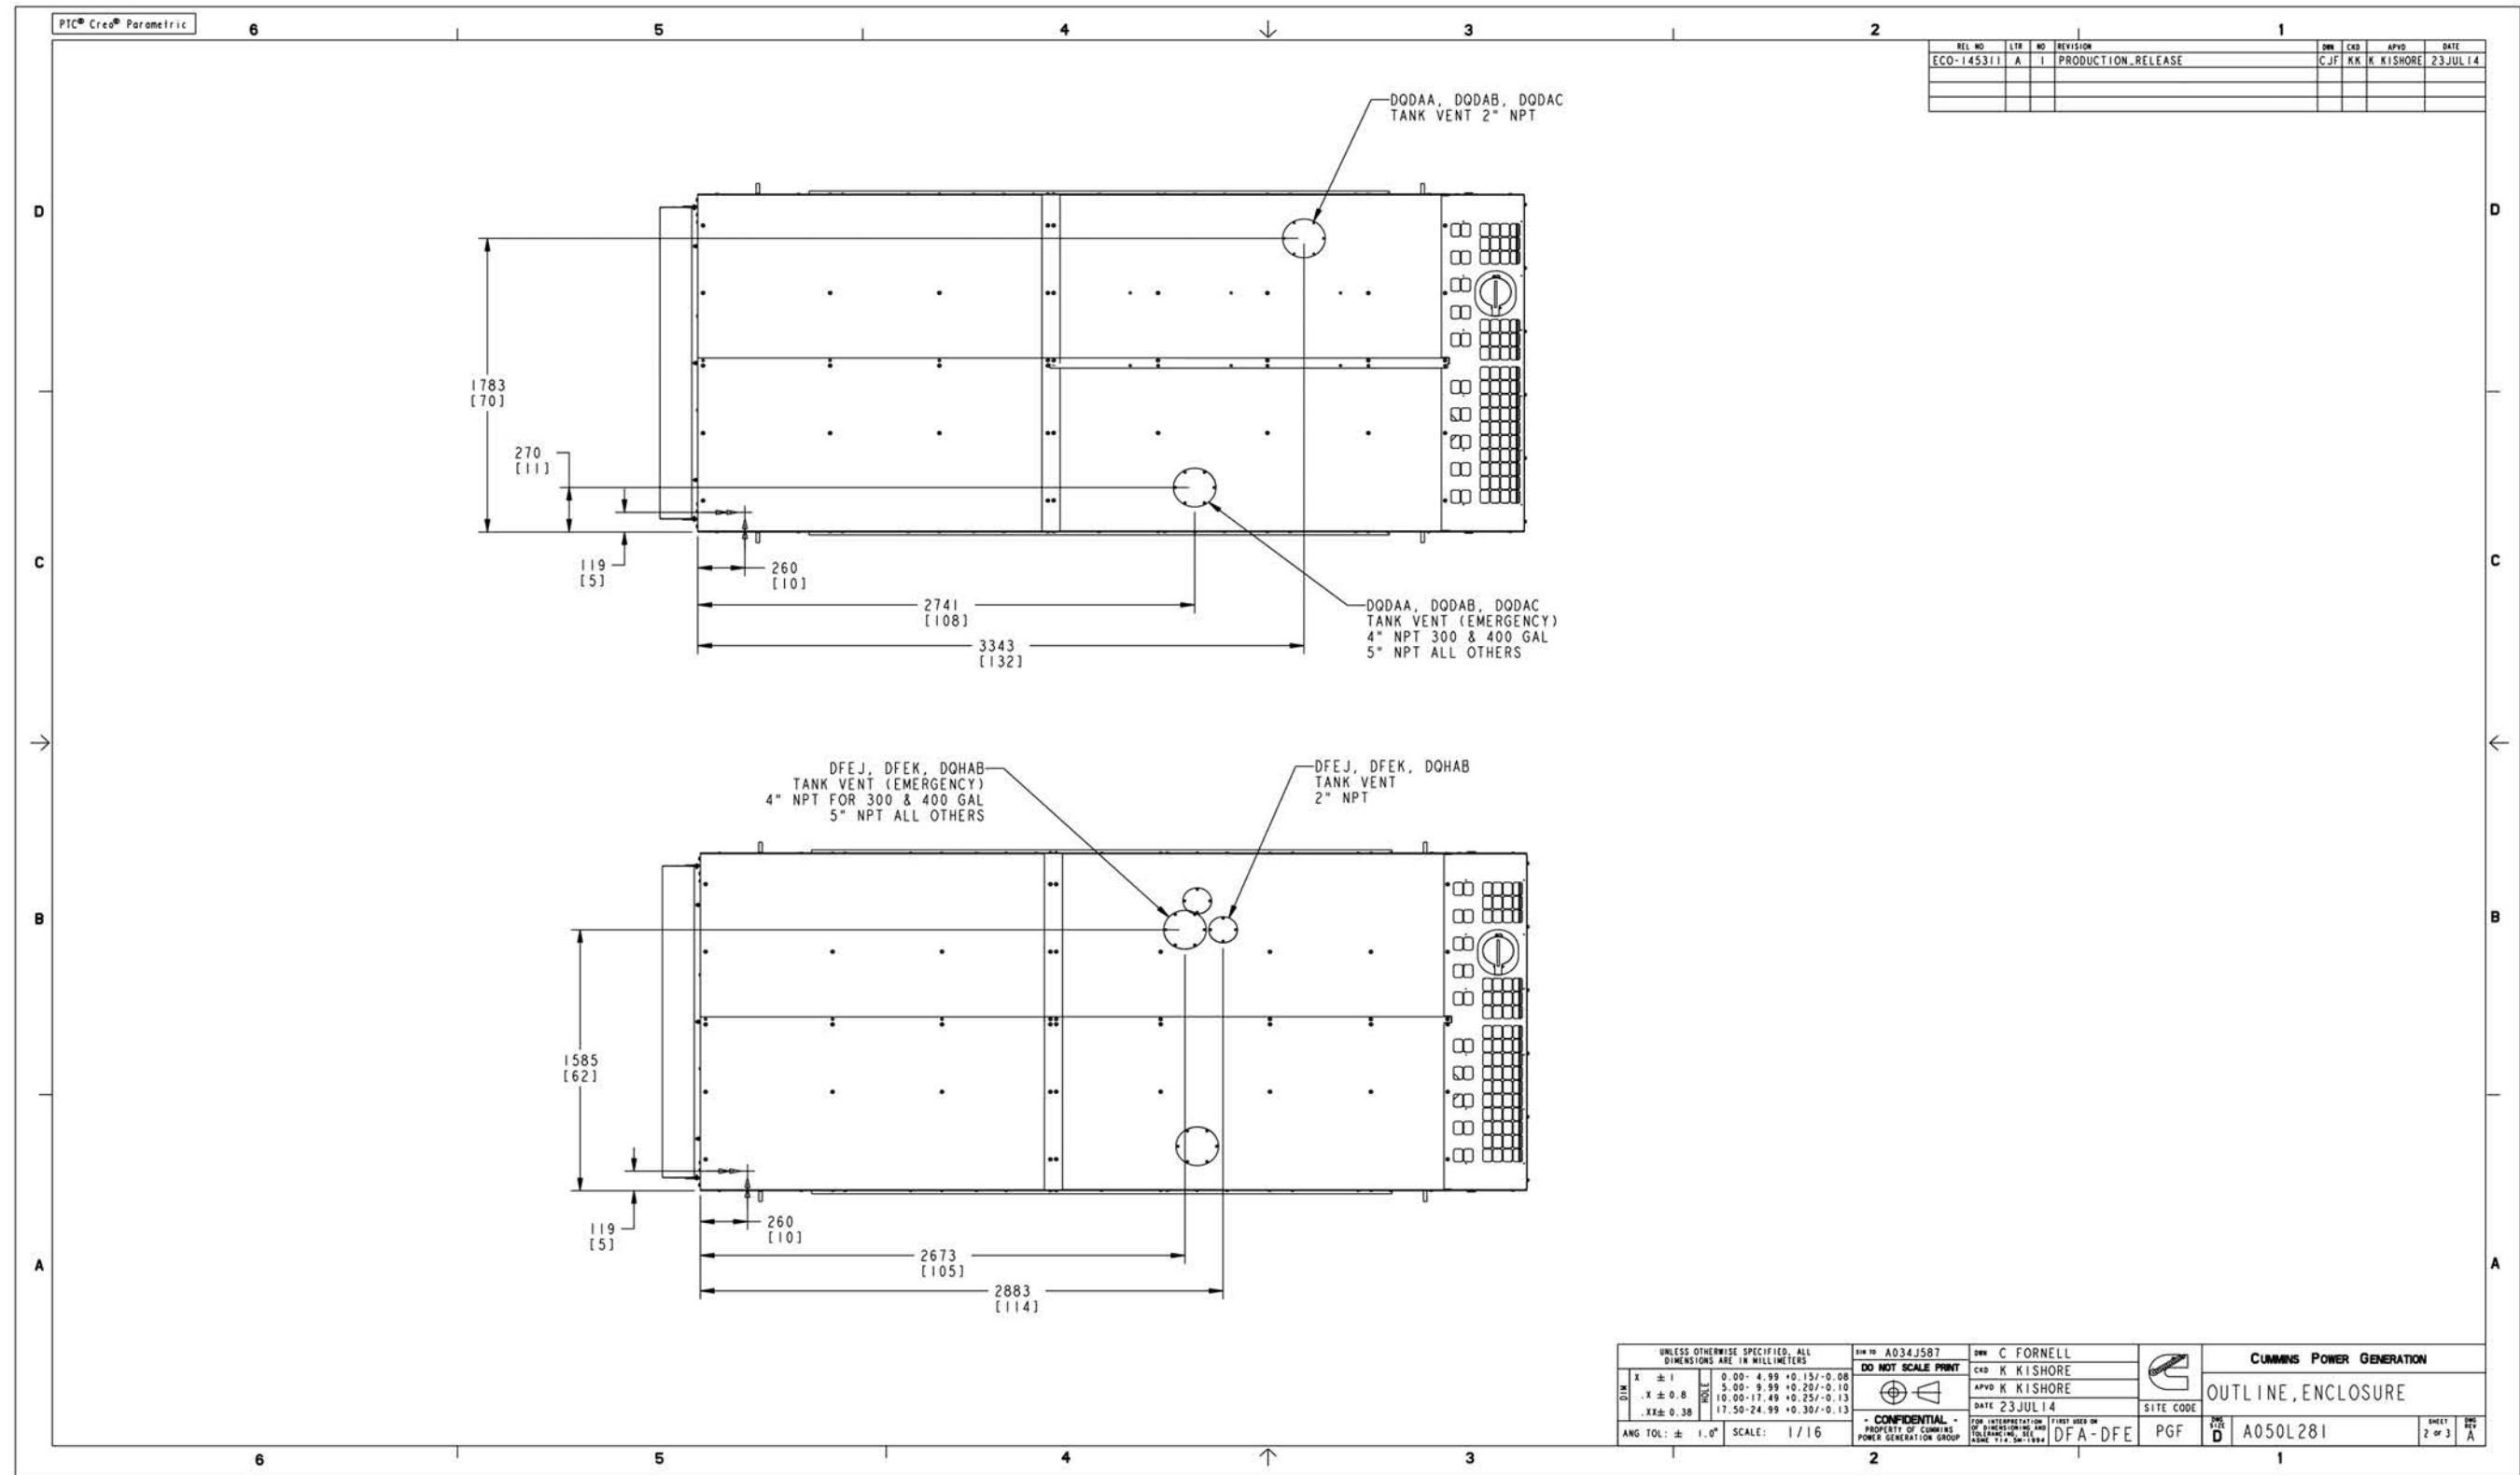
ENCLOSURE OUTLINE DRAWING SHEET 2 OF 3
